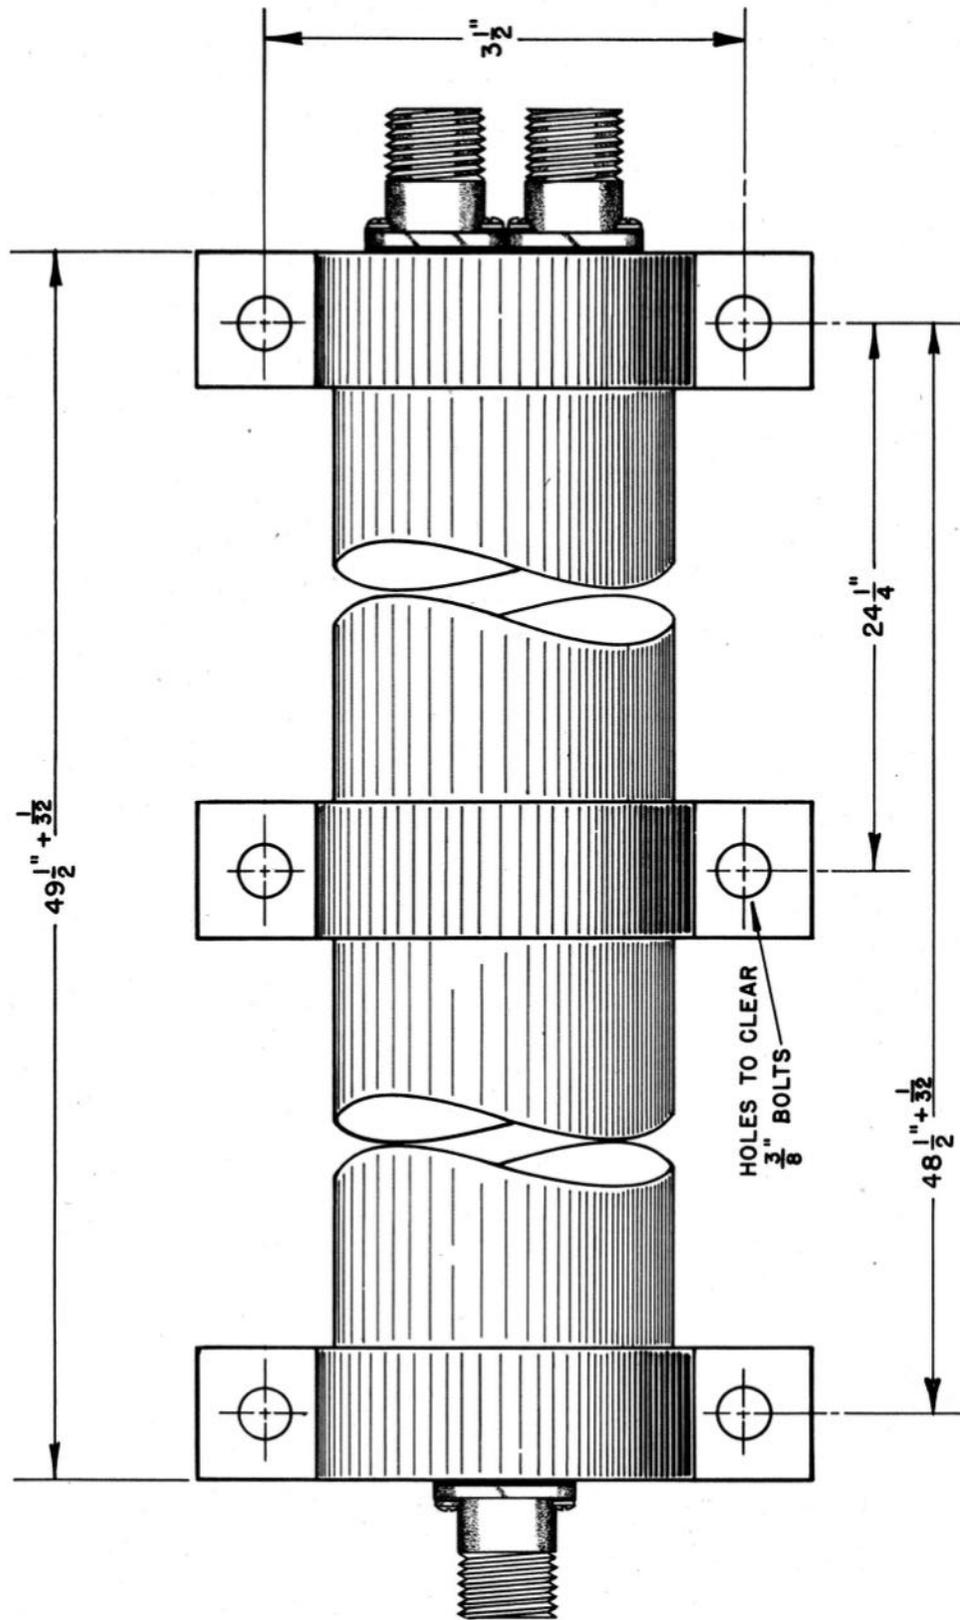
Impedance Matching Transformer CU-19/SPR-1, Outline Dimensional.
